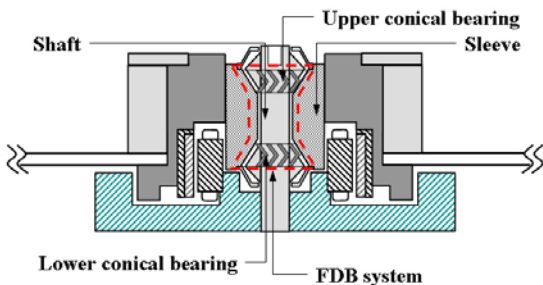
Structure of a HDD spindle system with coupled journal and conical bearing
